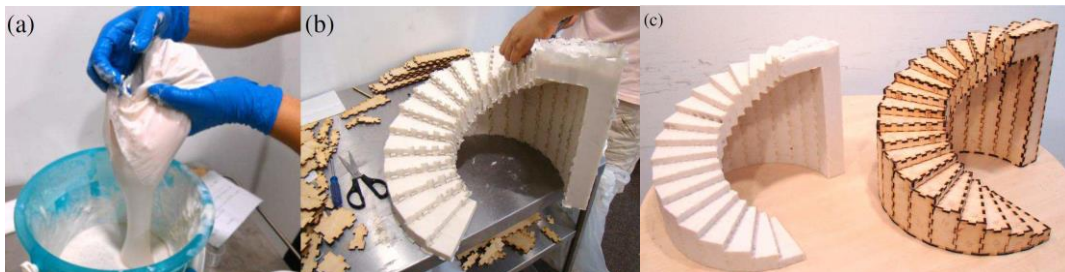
Casting of a silicon gel model using the finger-joint structure as the mold.
